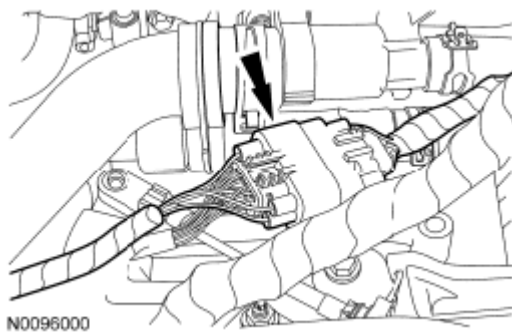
Locating Engine Wiring Harness Electrical Connector
